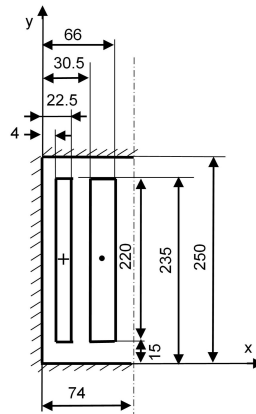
Dimensions of magnetic circuit and windings of the employed transformer
